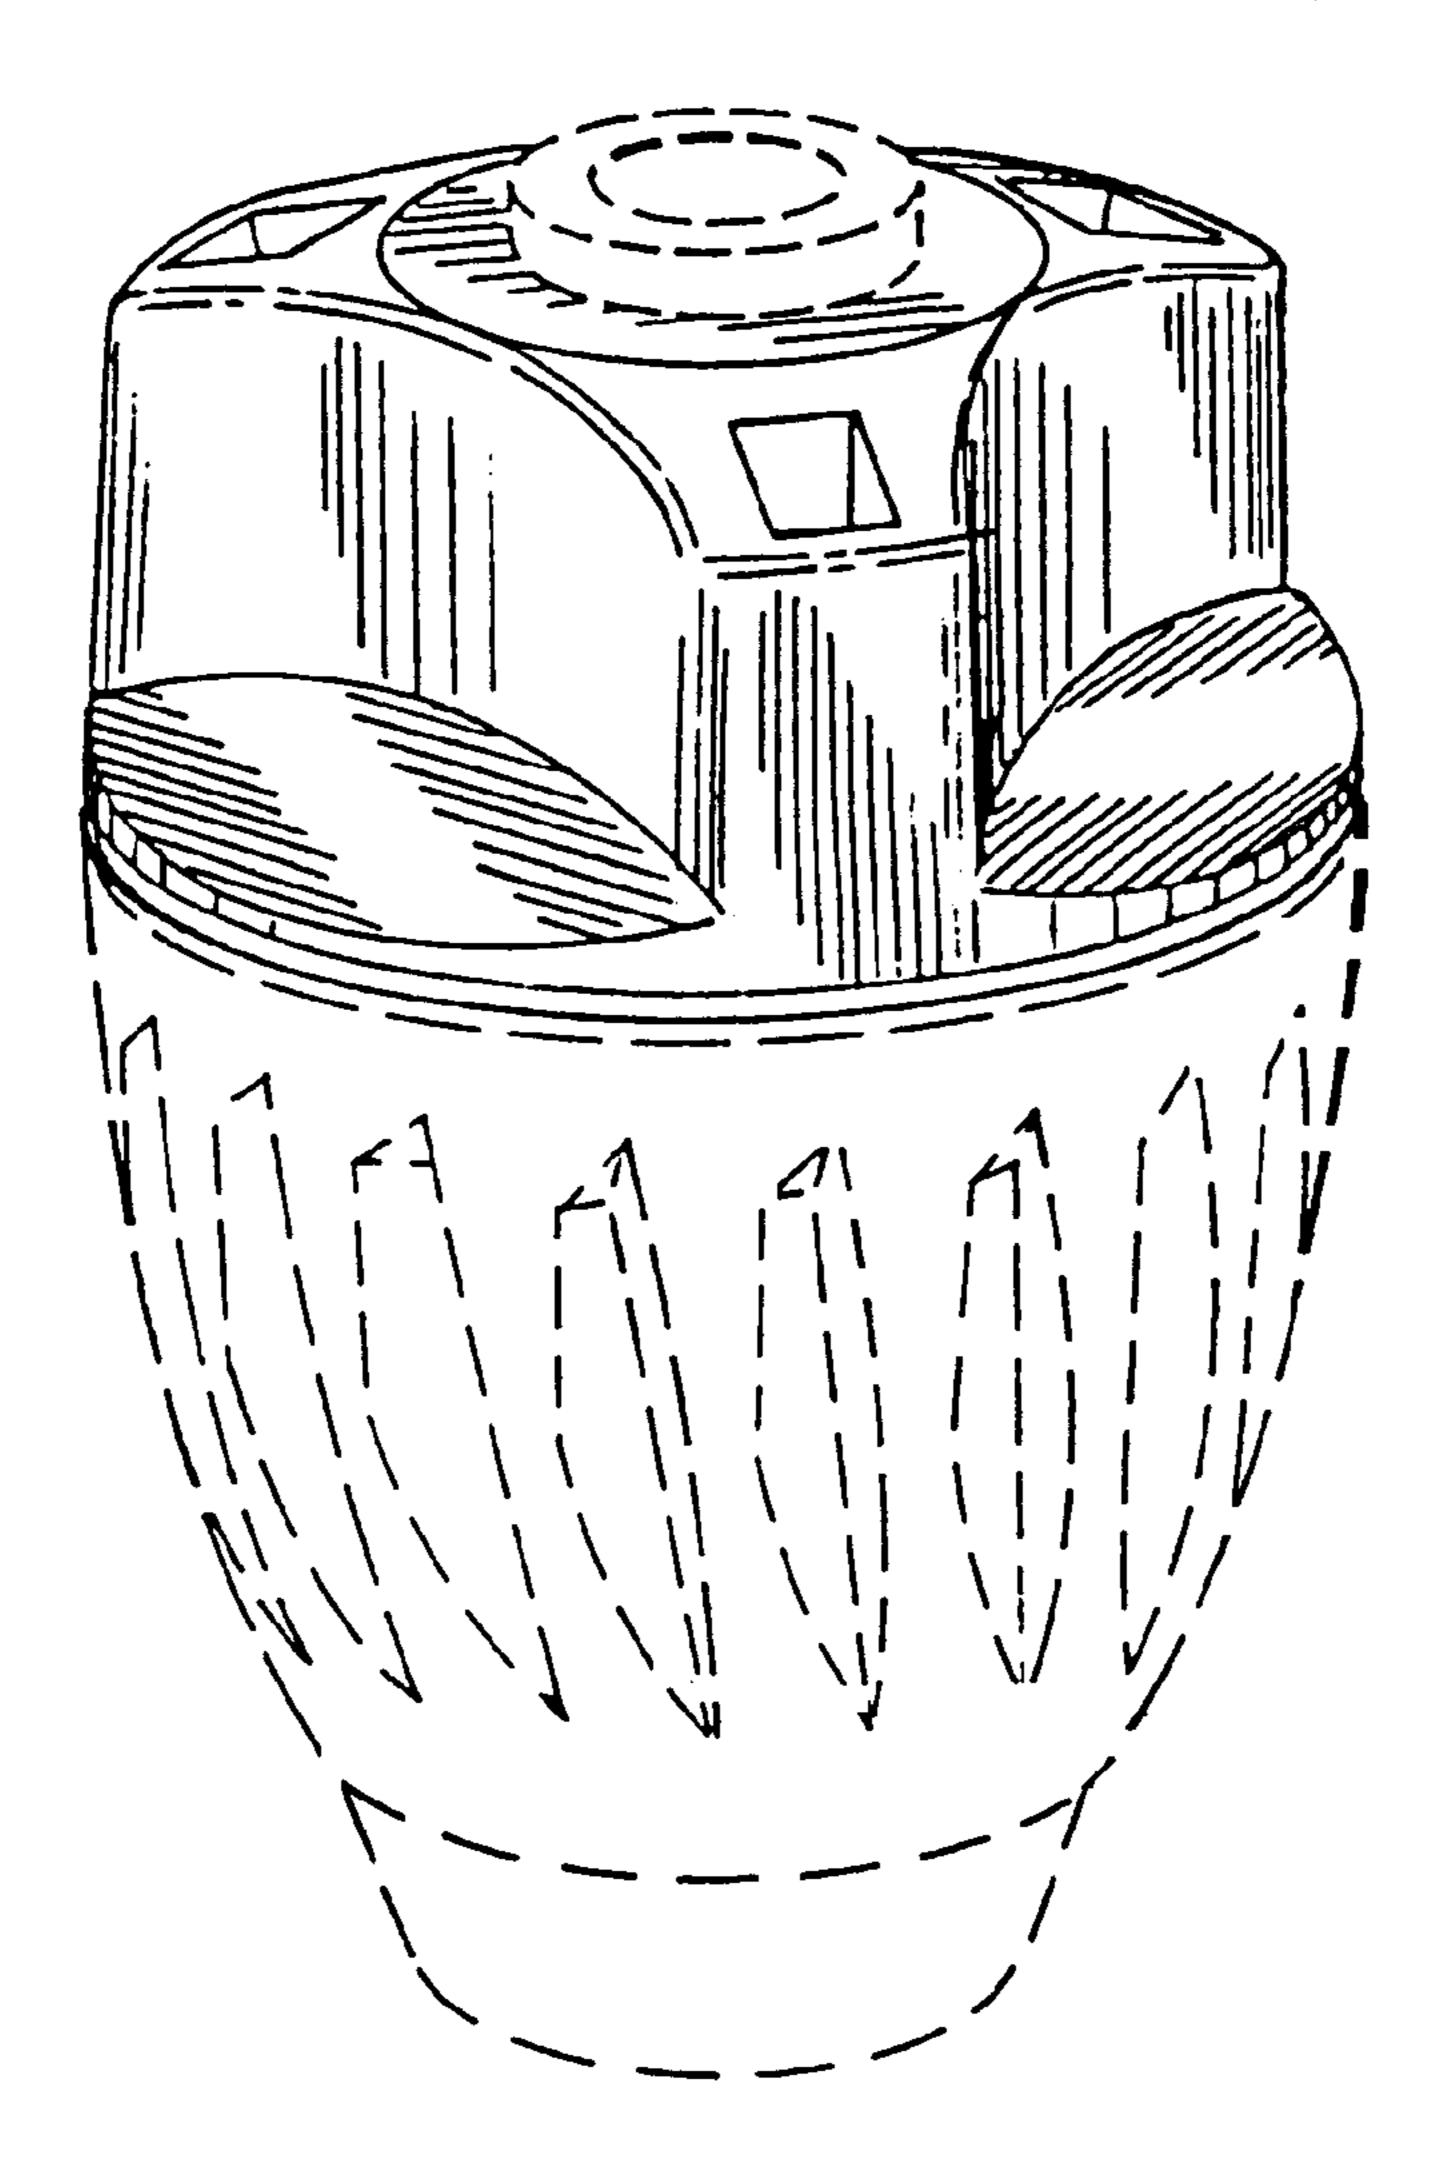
is another side view of the multi-lobal rear chuck sleeve as illustrated in FIG. 1.
